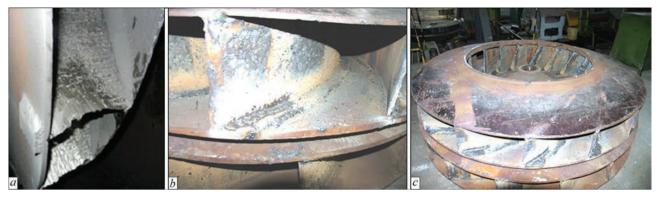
Worn (a) and deposited (b) wheel blade of the mill fan, renovated wheels of the mill fan VM 100/1200 (c)
